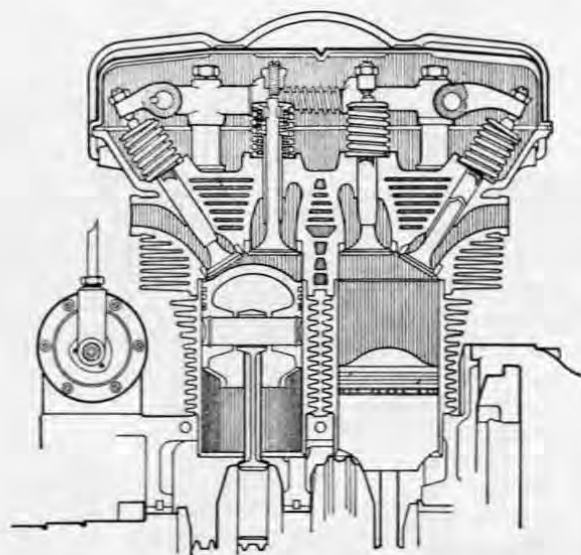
Cylinder head of the air-cooled Porsche engine. Note the enlarged cooling air passage and larger intake valve.
